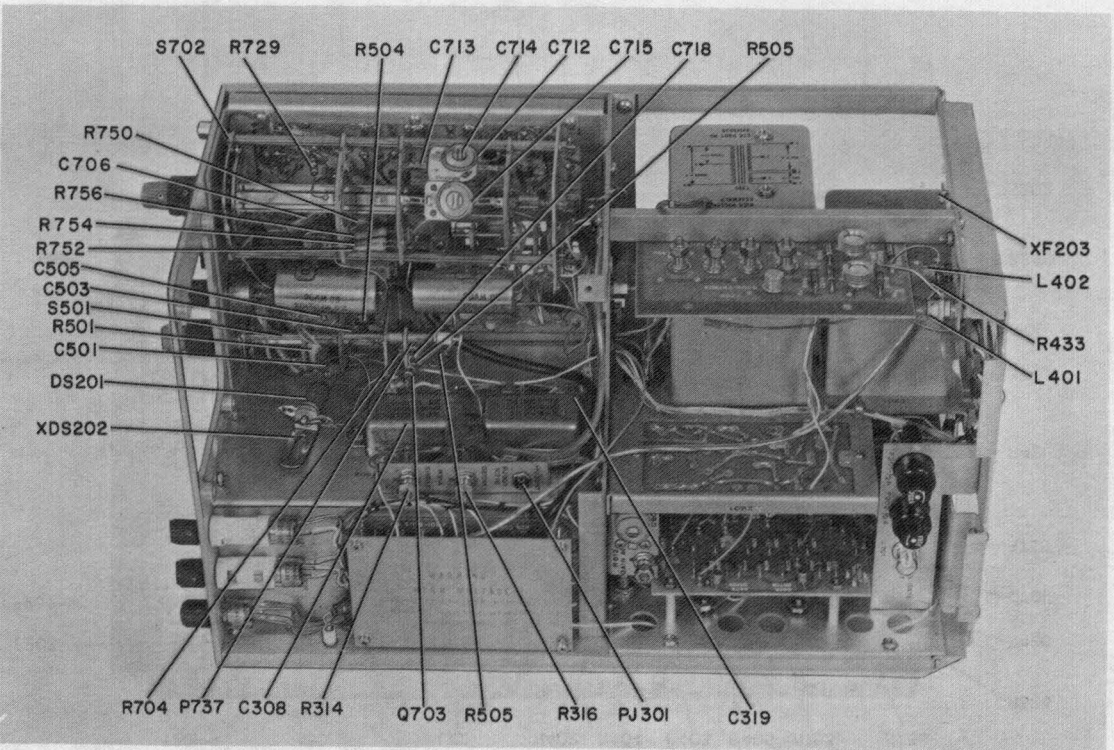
Oscilloscope AN/USM-117A, 117B, 117C Chassis Assembly, Side View
